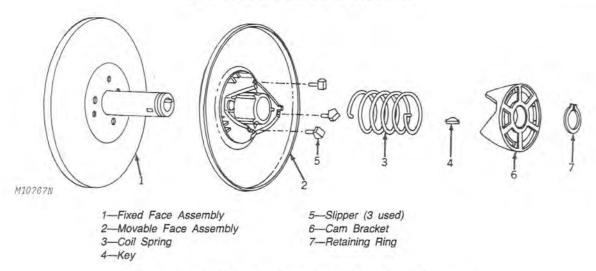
Exploded View of Model 780, 850 and 910 Driven Sheaves
